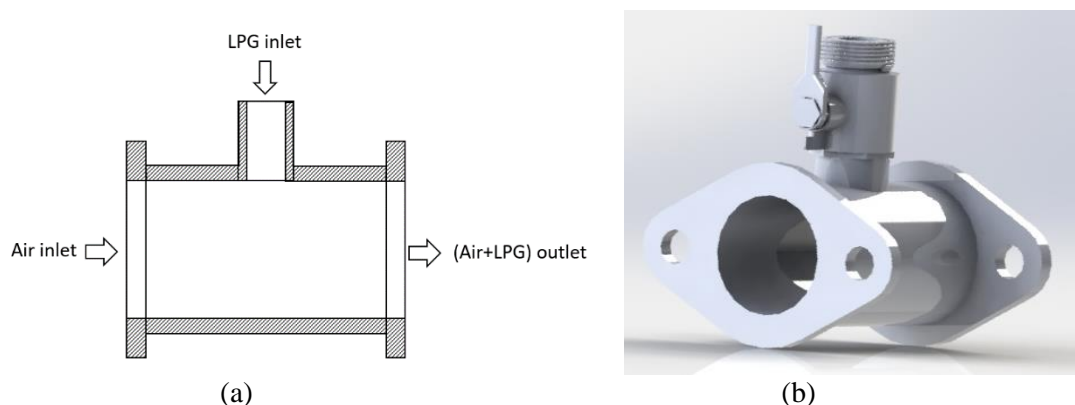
Schematic design (a) and engineering drawing (b) of LPG-air mixing device
